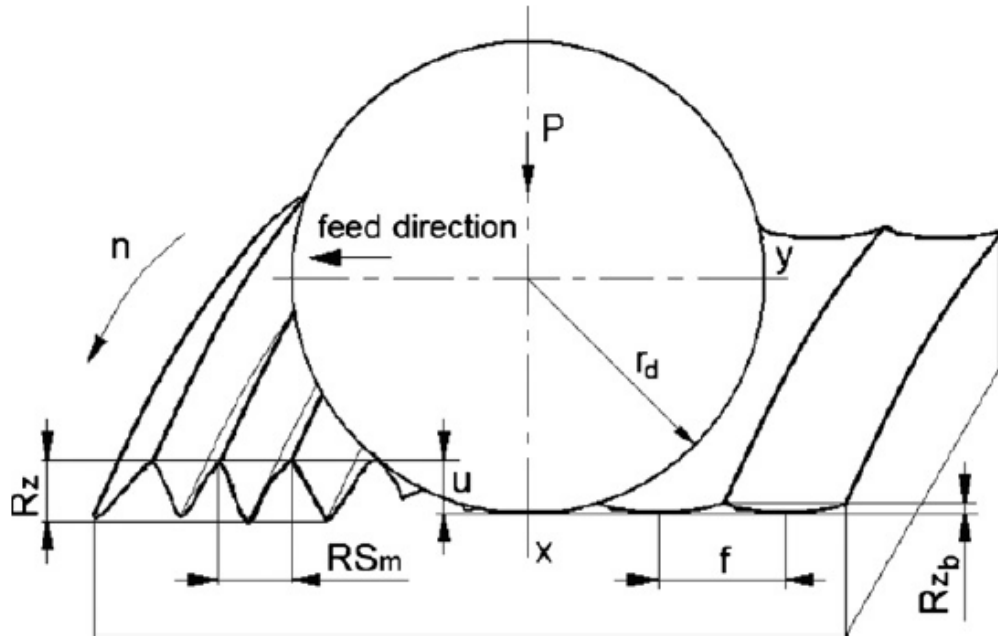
Model of smoothing slide burnishing with a ball-tipped tool: P is the burnishing force (burnishing pressure, tool pressure force), f is the feed, n is the rotational speed, R_z is the surface roughness before burnishing, R_{z_b} represents the surface roughness after burnishing, r_d is the radius of tool tip rounding, u is the tool indentation, RS_m is the mean spacing of profile irregularities before burnishing (Korzynski, 2009).
